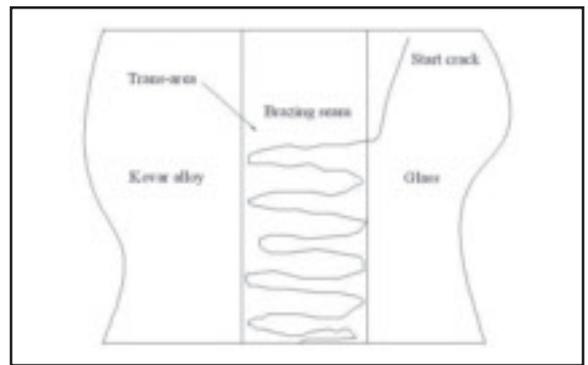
Map of rupture crack path of a brazed joint.
